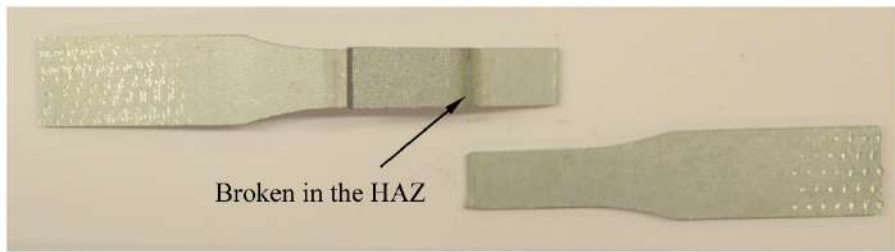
Tensile shear test results of the weld joint obtained under a scanning speed of 30 mm/s, and a defocused laser beam off-set distance of 44 mm (the preheating and welding laser power is 4.0 kW; the welding speed is 60 mm/s)
